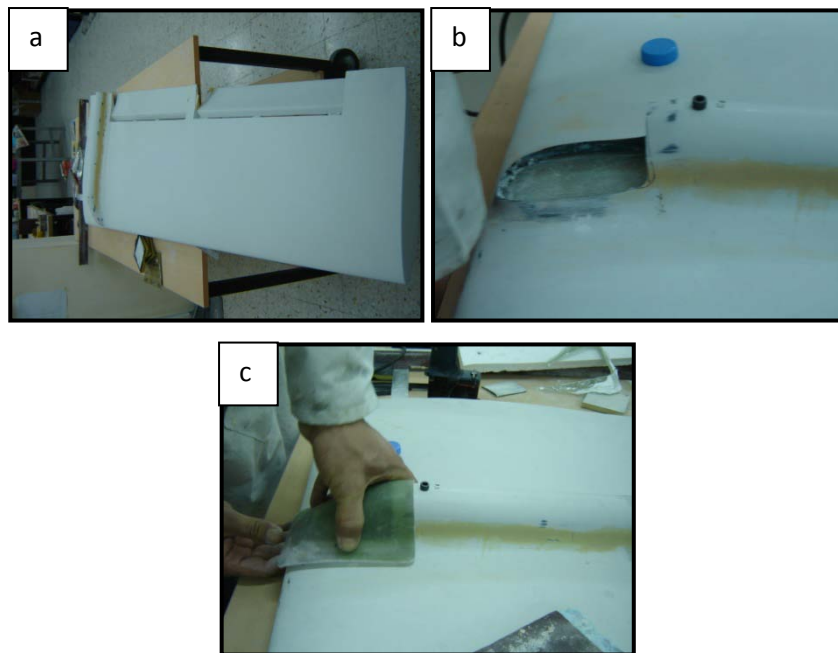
Tail boom tube fixed to the wing (a), Tip of the tube cut out (b), Tip part manufactured separately (c)
